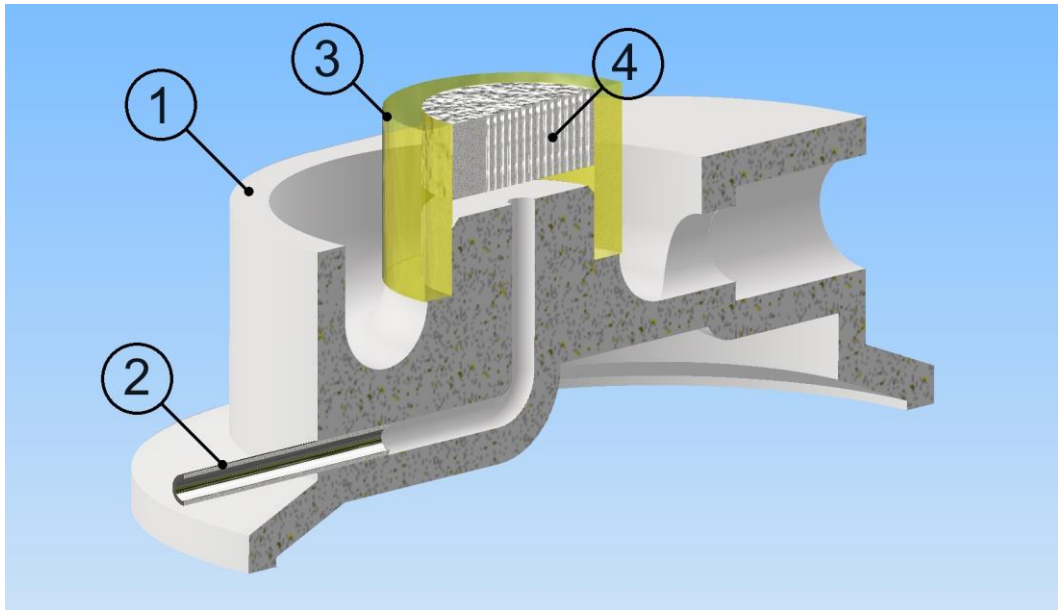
3D CAD drawing of the scaffold housing assembly.
